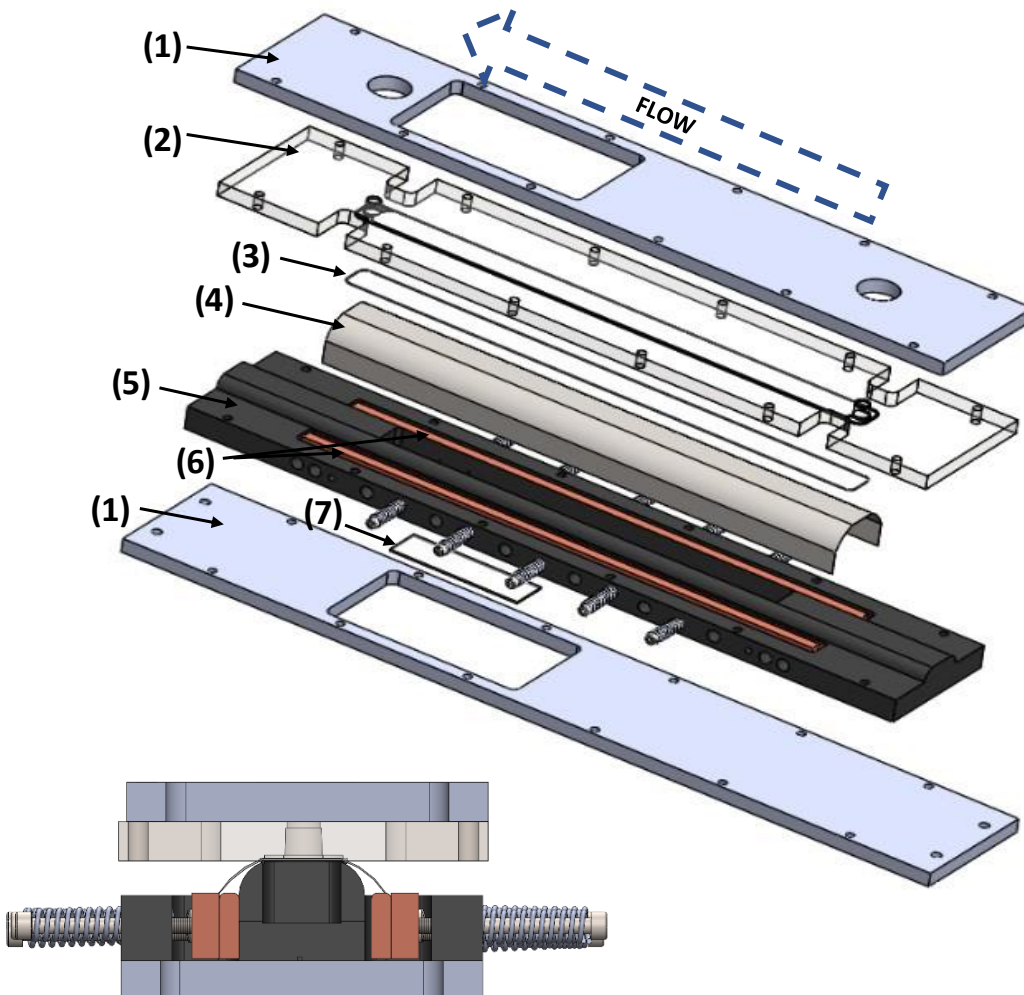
Exploded assembly view of test setup, showing (1) aluminium support plates, (2) channel profile plate, (3) O-Ring, (4) foil, (5) heater support plate, (6) copper busbars, (7) IR glass
